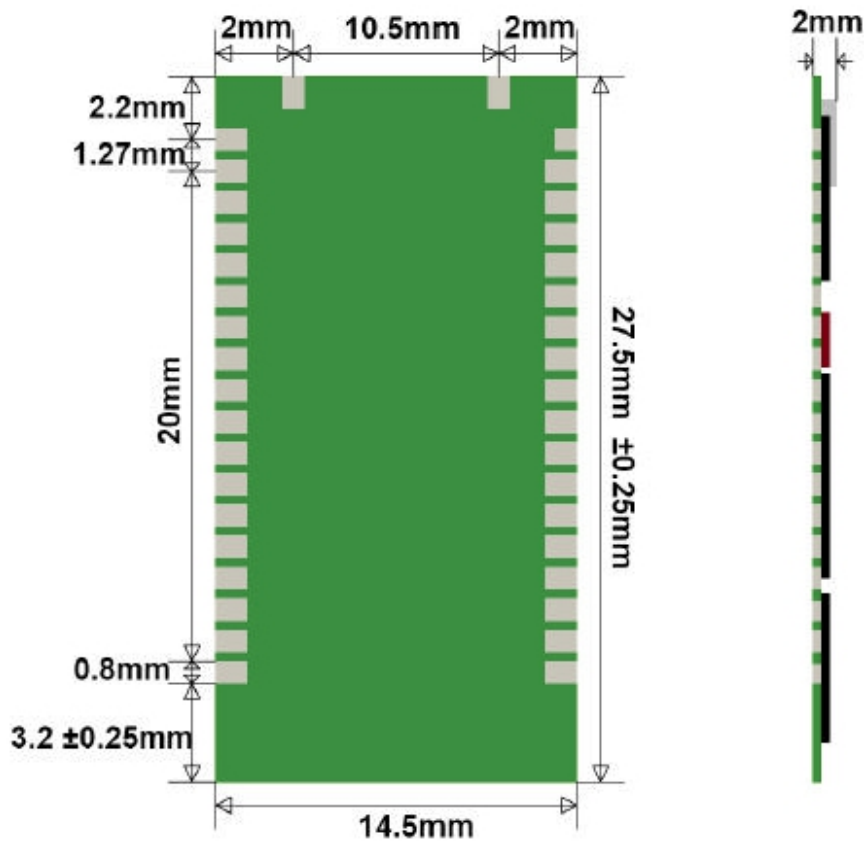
Dimensional Drawing of the BT44-111S (top & side views)
